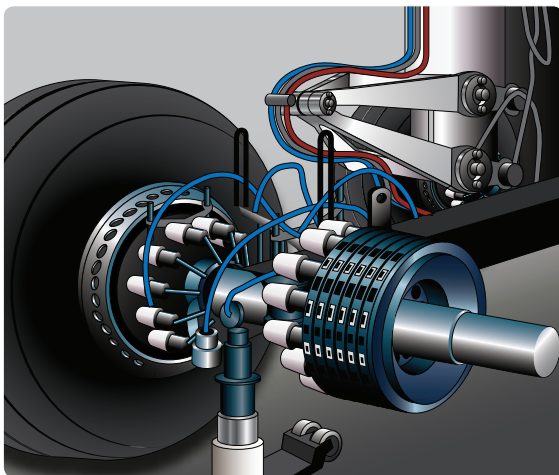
Many modern segmented rotor disc brakes use a housing machined to fit numerous individual actuating pistons.
